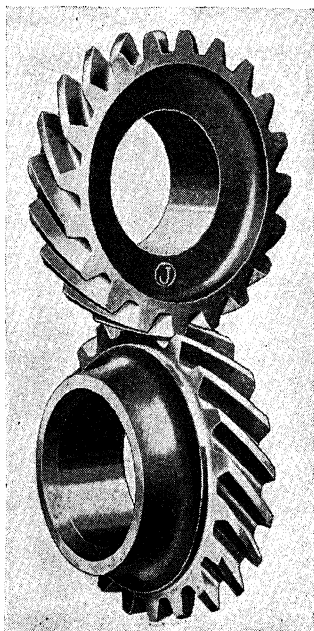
Identical helical gears used on shafts at right angles. (Courtesy W. A. Jones Foundry and Machine Company.)
